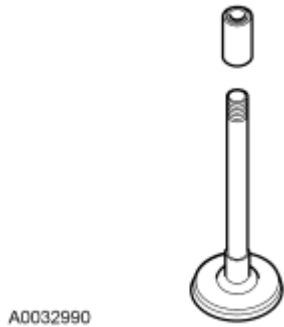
Identifying Valve Stem Seal Installation Sleeve
